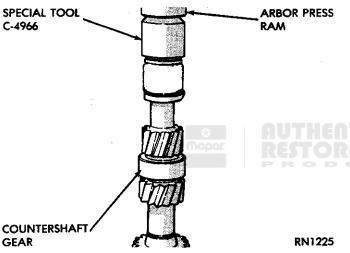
Installing Countershaft Gear Rear Bearing Cone
